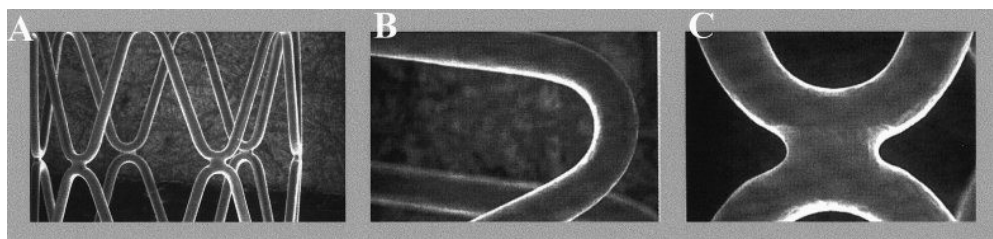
Bridge stent – a) sinusoidal elements, b) smooth ends c) laser welds. From [32]
